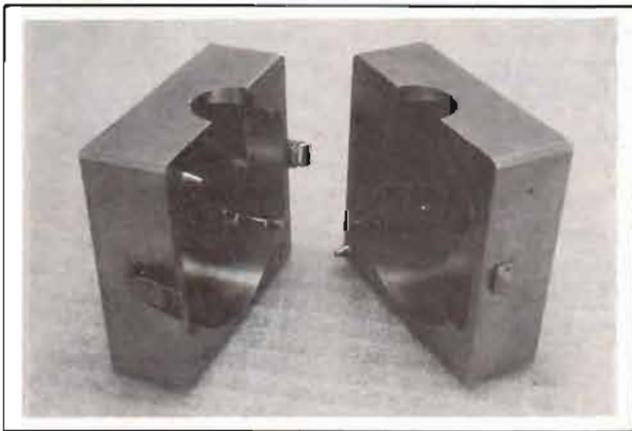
Typical Test Fixture for Current Drivers and Current Probes.
